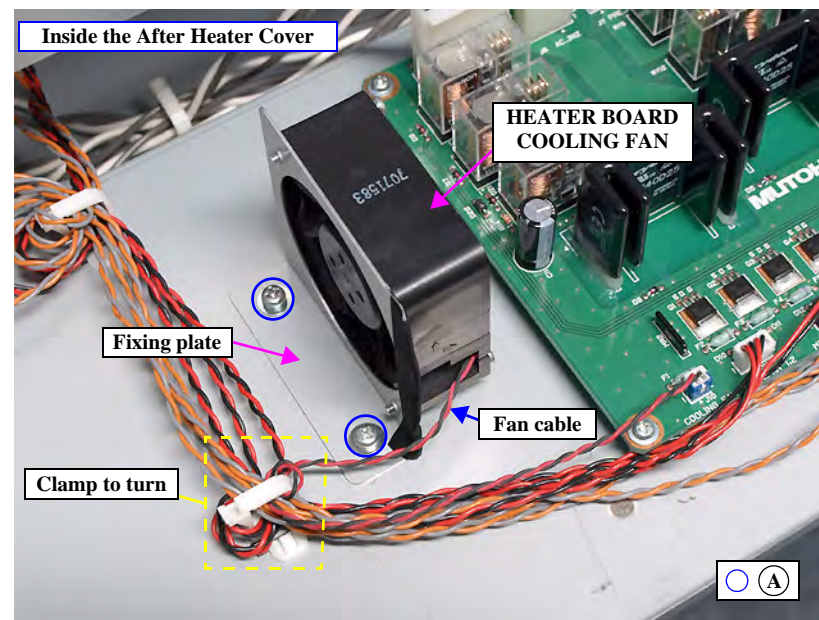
Detaching the HEATER BOARD COOLING FAN
